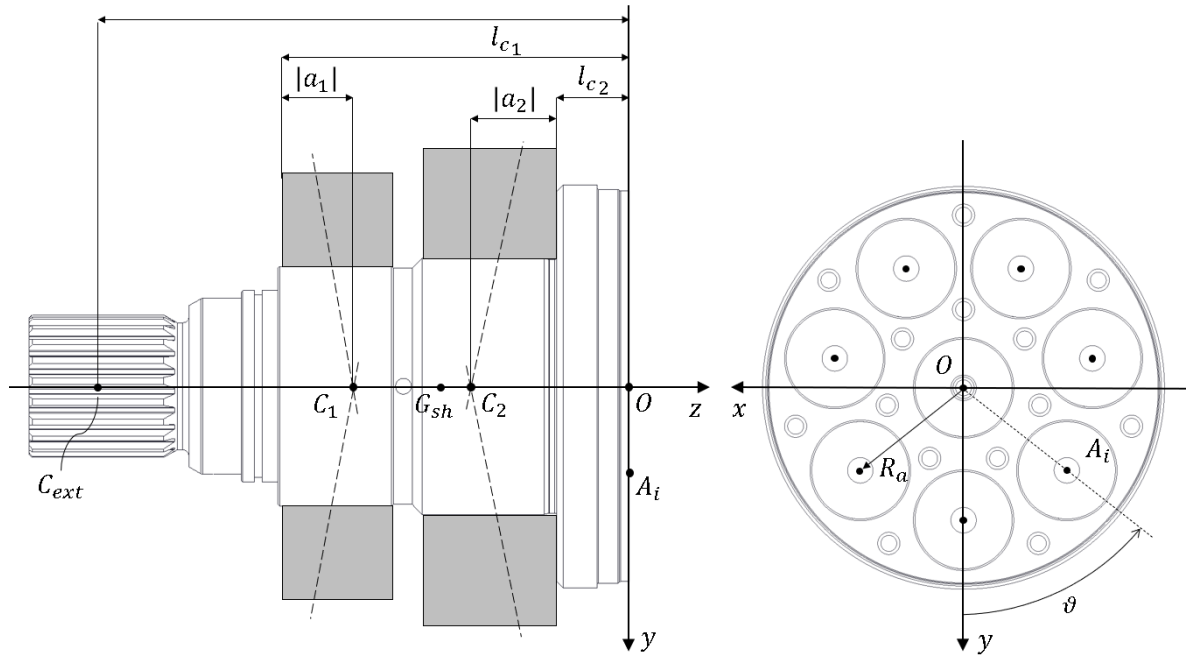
Shaft parametrization with X arrangement of the bearings
